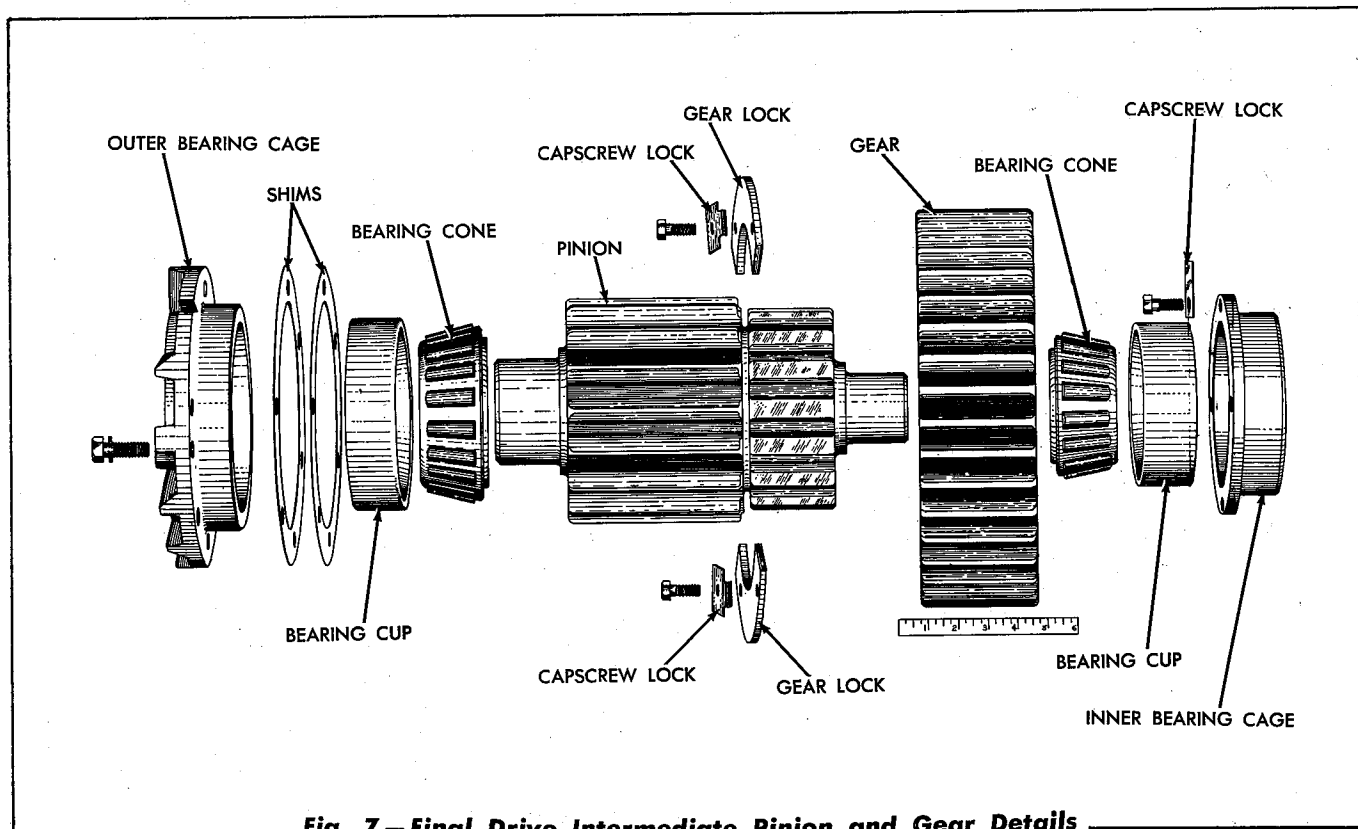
Final Drive Intermediate Pinion and Gear Details
